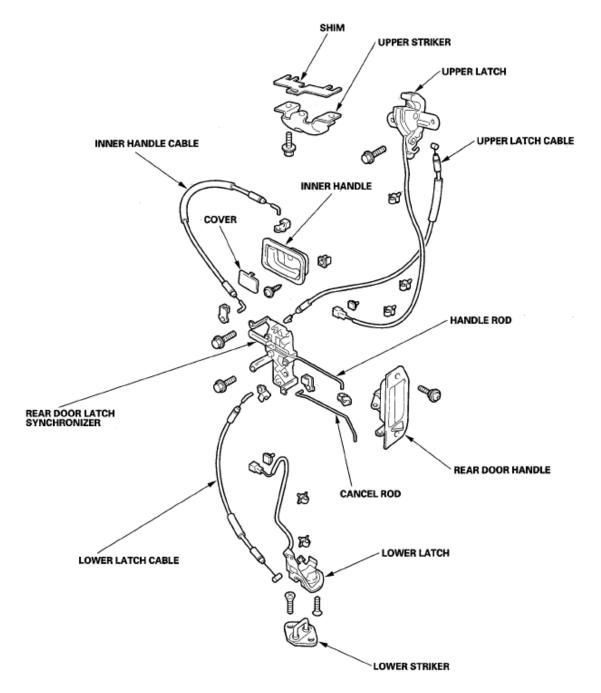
Exploded View Of Rear Doors Components (2 Of 2) Courtesy of AMERICAN HONDA MOTOR CO., INC.
